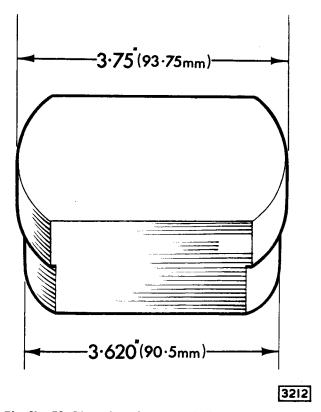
Dimensions for stepped block for cylinder liner removal
